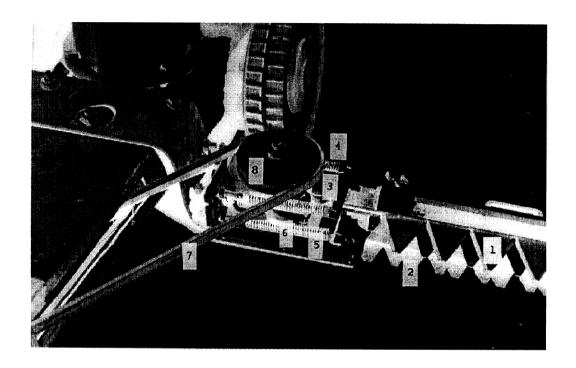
Drive of counter rotated bar: 1,2-scythe, 3-roller, 4,5-springs, 6-cam, 7-vee belt, 8-V belt pulley.
